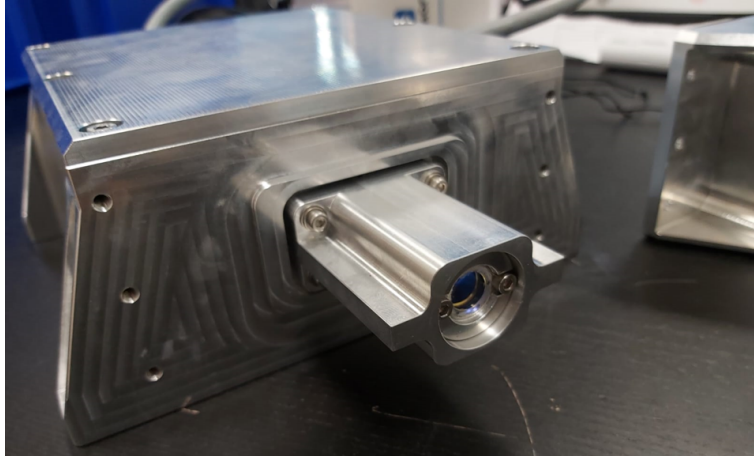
Photo of the assembled laser head module with the beam expander connected.
